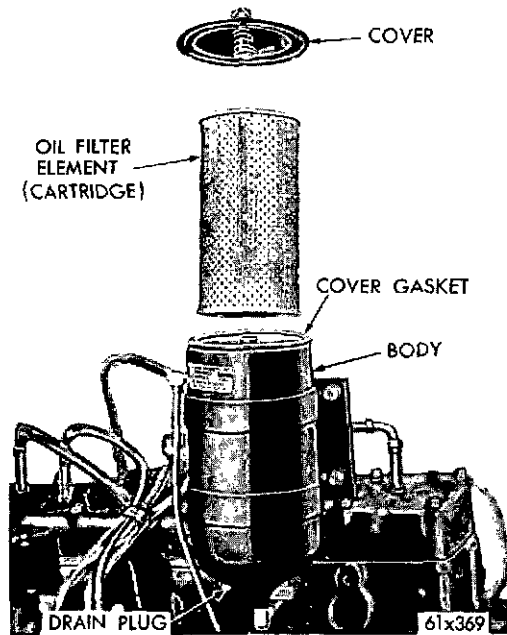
By-Pass Oil Filter Senior Element (Exploded View)
